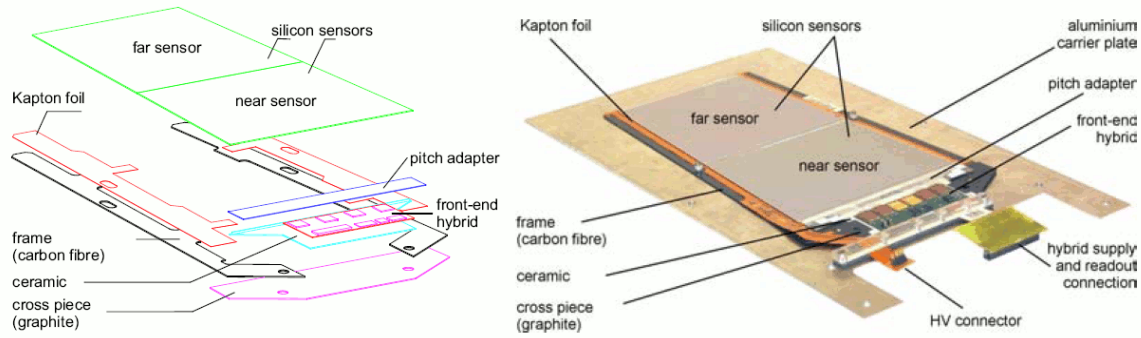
Exploded view of a module from the CMS strip tracker. From [37].
